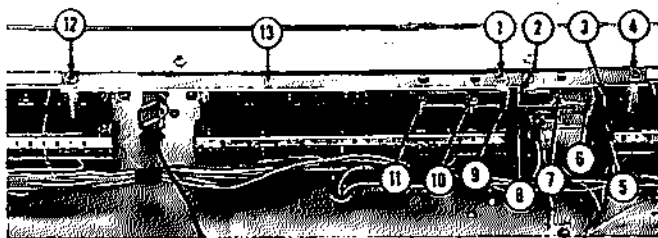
CONNECTOR LINK ADJUSTMENT - 2600
